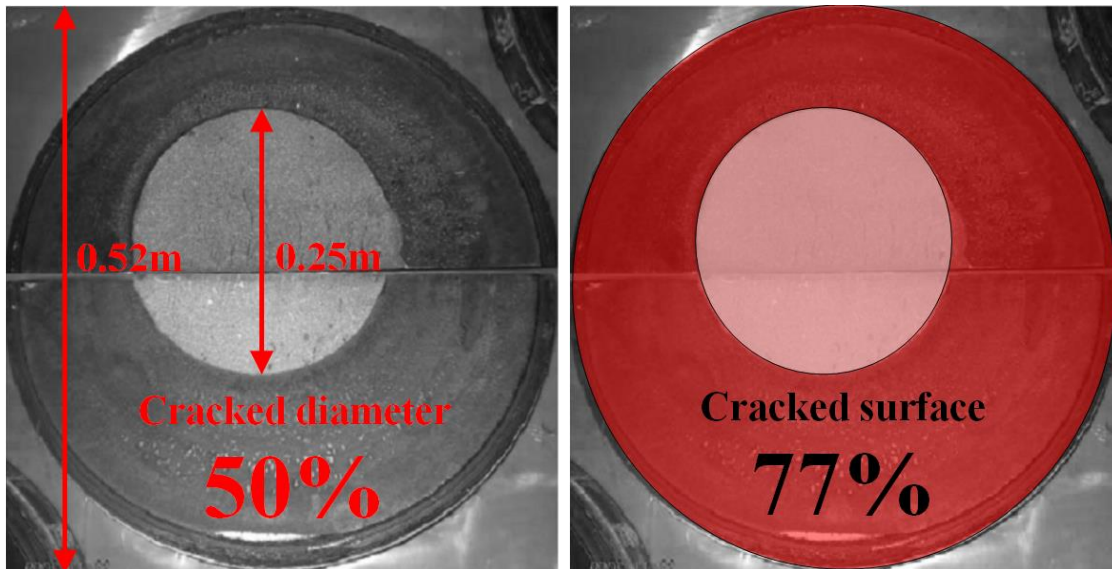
The steam turbine rotor crack section pictures cracked shaft diameter (left) and cracked surface area (right)
